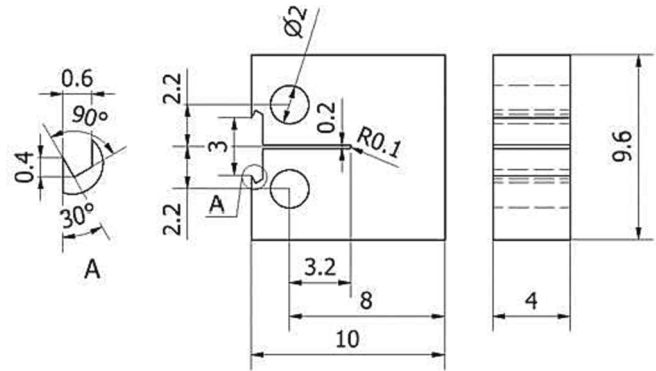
The geometry of the mini-CT specimens. Dimensions in mm.
